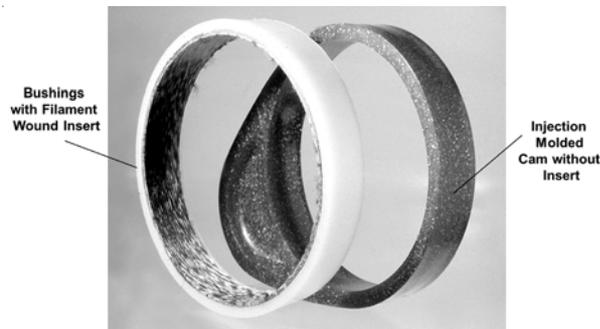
Real bushings made by thermoplastic filament winding in combination with injection molding (left), and example of complex, injection molded shape (here: cam) without the filament wound insert (right)
